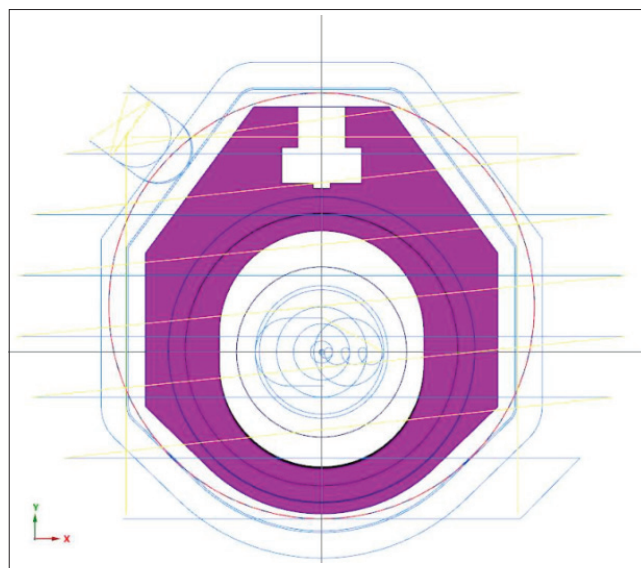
Exemplary machining paths for a wedge – mounting 1
